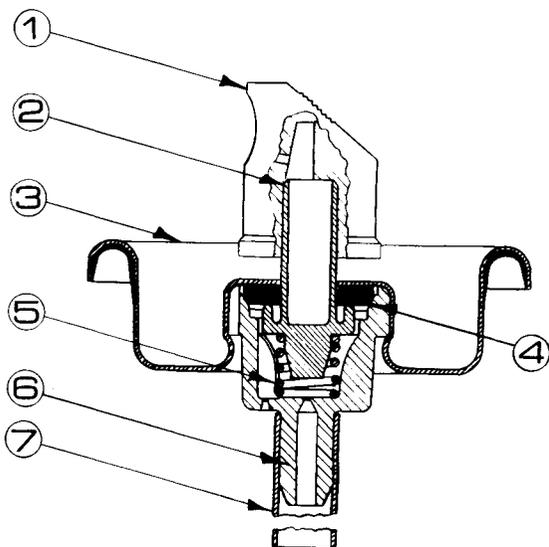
S-63 Tilt Valve by Summit Packaging Systems
